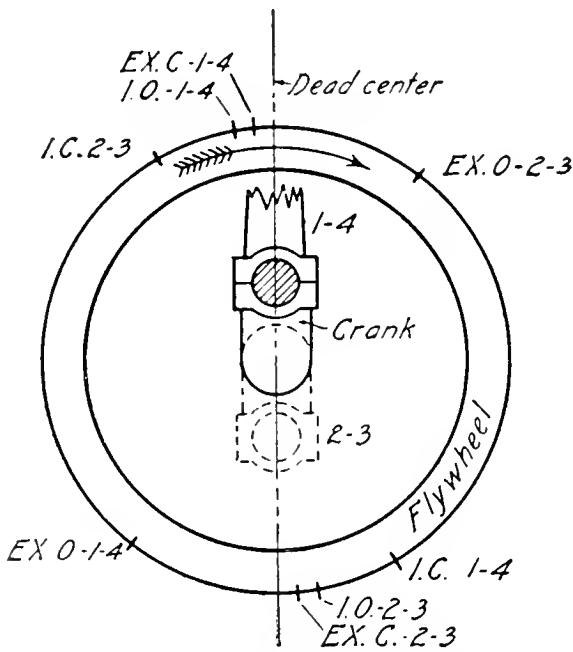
The flywheel markings as they would be found on a four-cylinder four-cycle automobile or tractor engine on dead center
